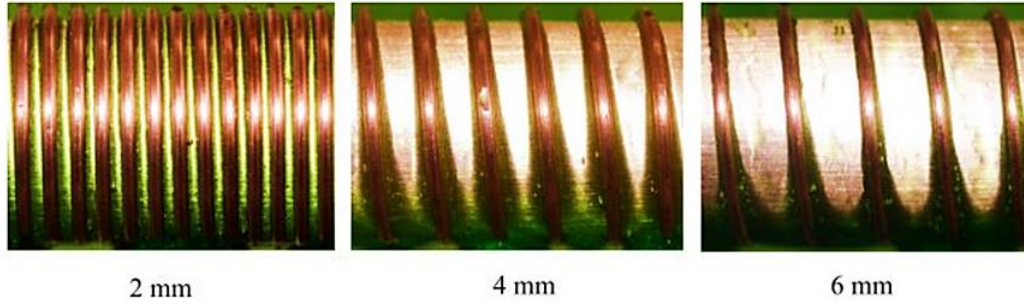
The horizontal copper tube with wrapped wires have various pitch dimensions [33].
